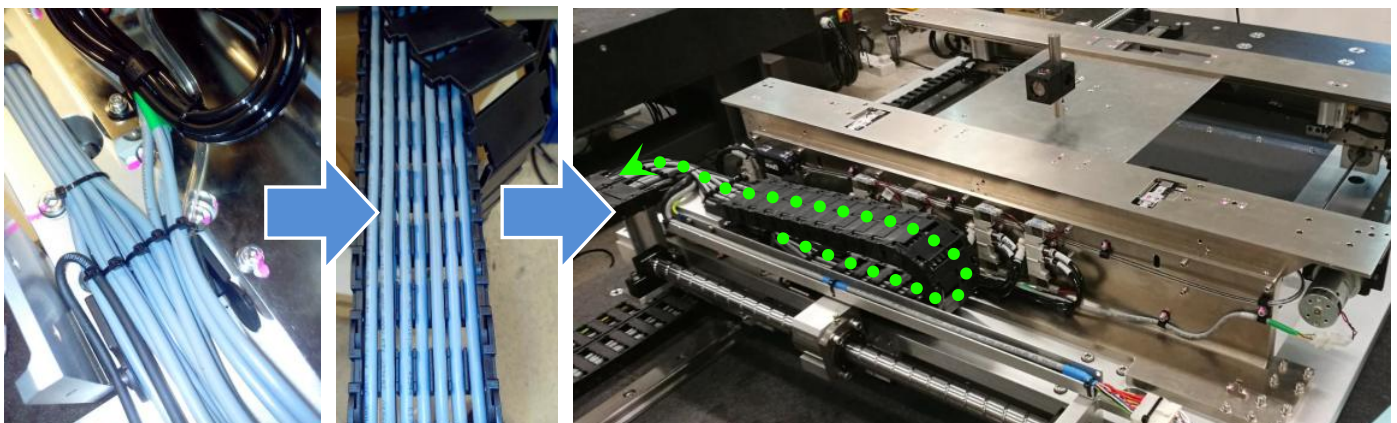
Stepper Motor Cable Routing (X Axis E-Chain)-Reference Picture Only
